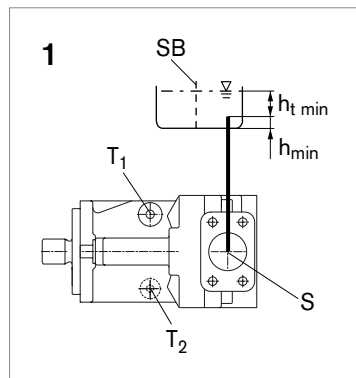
Below-reservoir installation for size 16 to 40 with installation position 1
